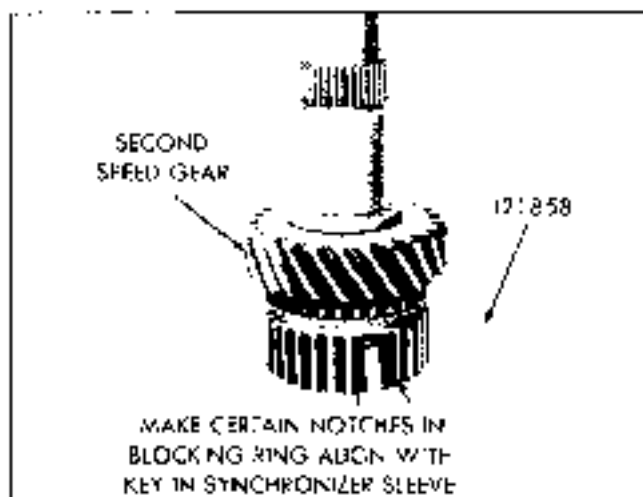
B-22 Installing Second + Third Speed Synchronizer and Gear
